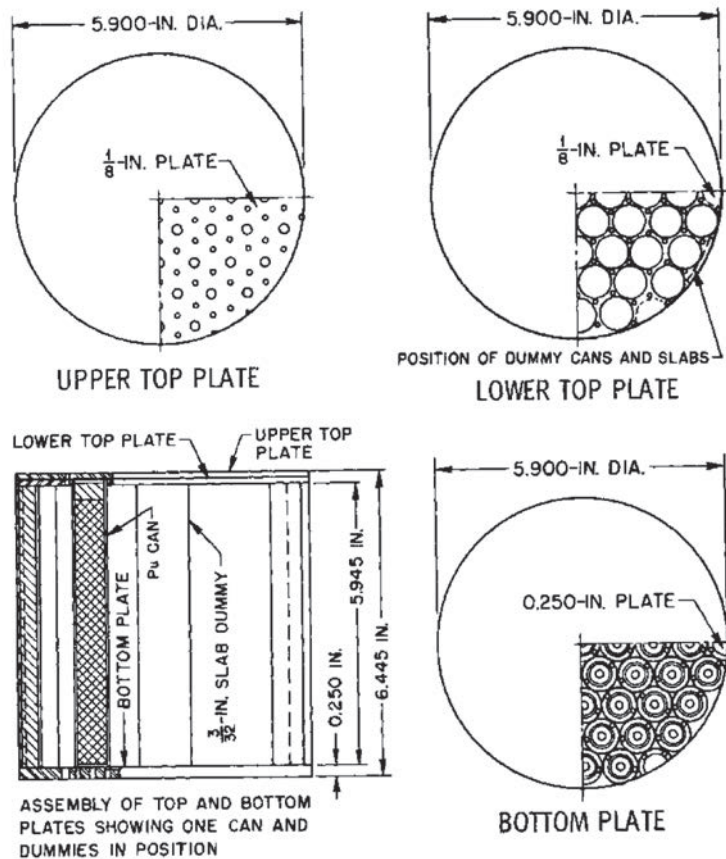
Clementine core cross-section and elevation [4.3].
